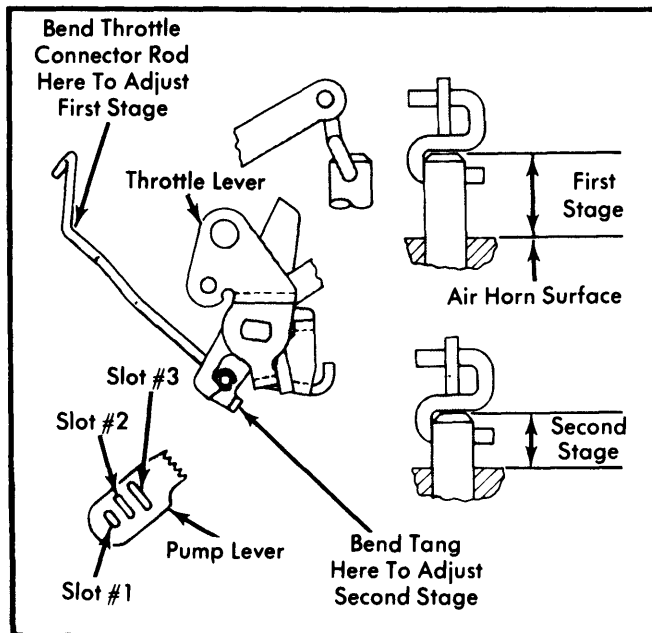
Adjusting Accelerator Pump Stroke (First and Second Stage)
